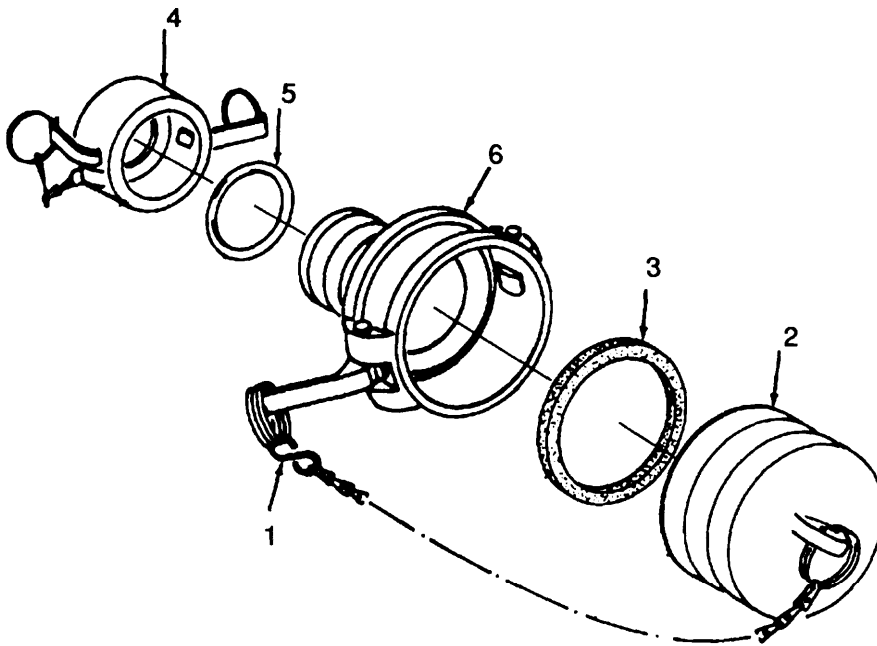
Adapter Assembly, Disassembly/Reassembly.
